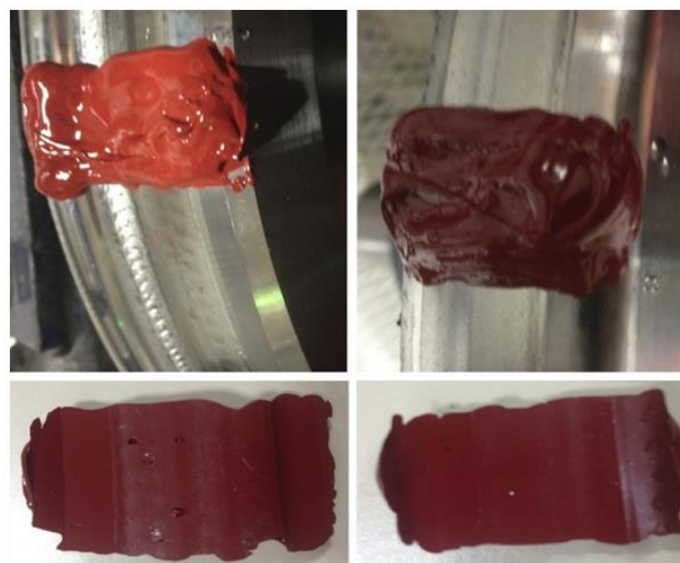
10 Sample of replica material on the wheel and rail surfaces; and after removed
